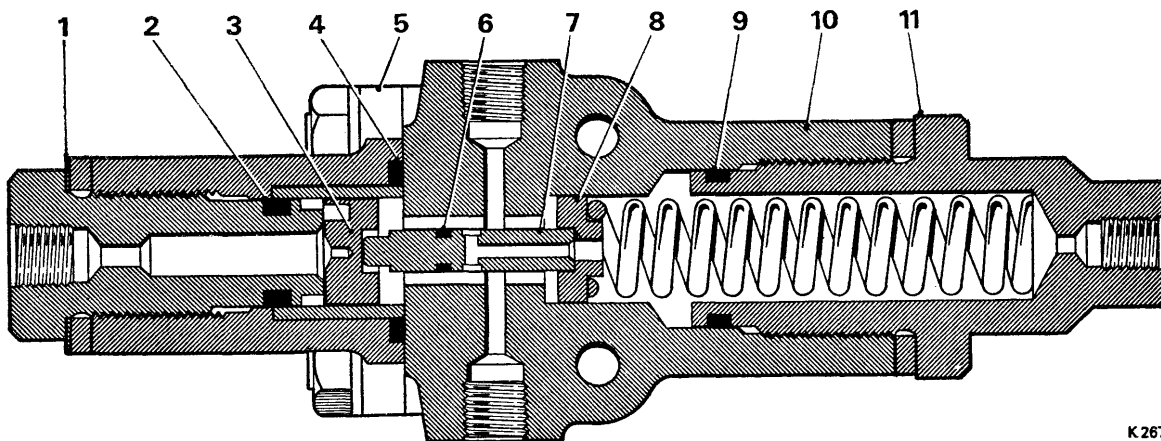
CUT-AWAY VIEW—ROLL RESTRICTOR VALVE
